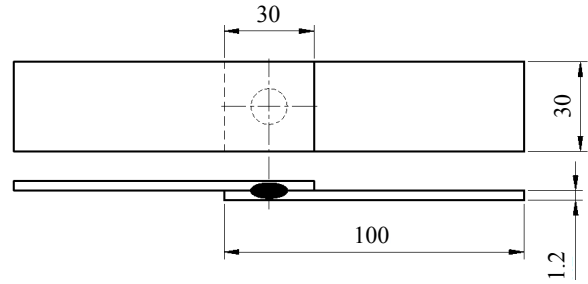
Schematic drawing of the specimen (Unit: mm)
